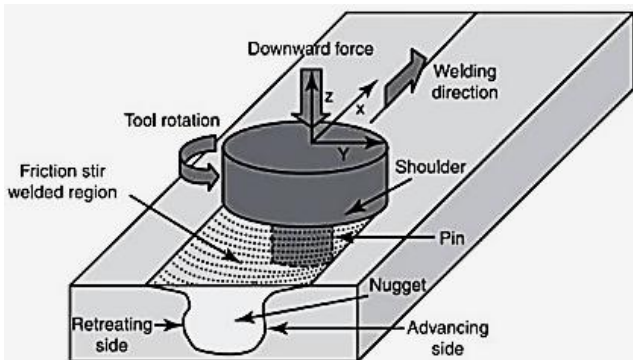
A solid-state joining technique developed by The Welding Institute (TWI) called FSW that traversed along joint line (Singh *et al.*, 2018).
